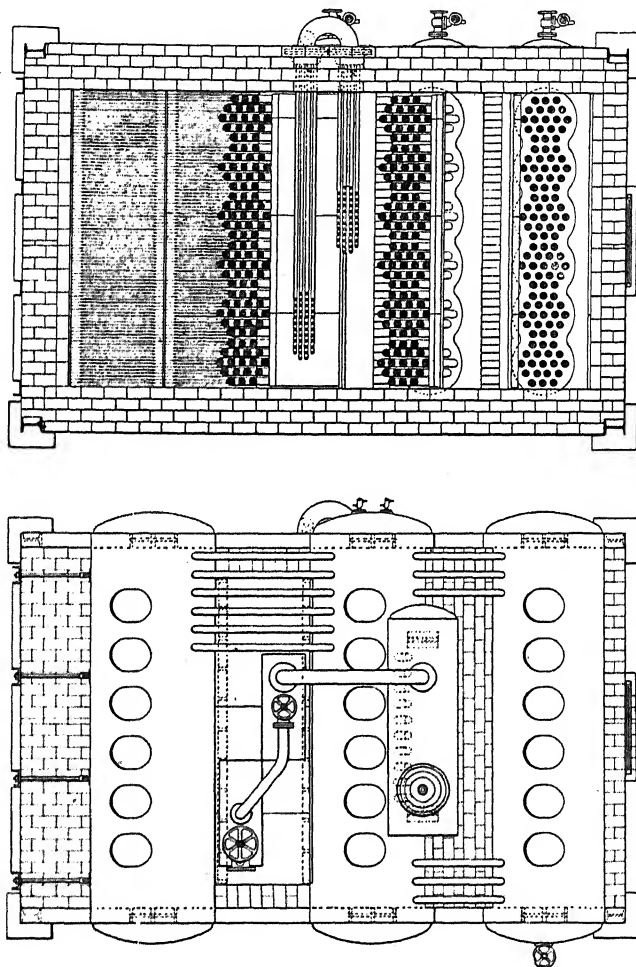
Sectional and external plan-views of the water-tube boiler shown in Fig. 218.
